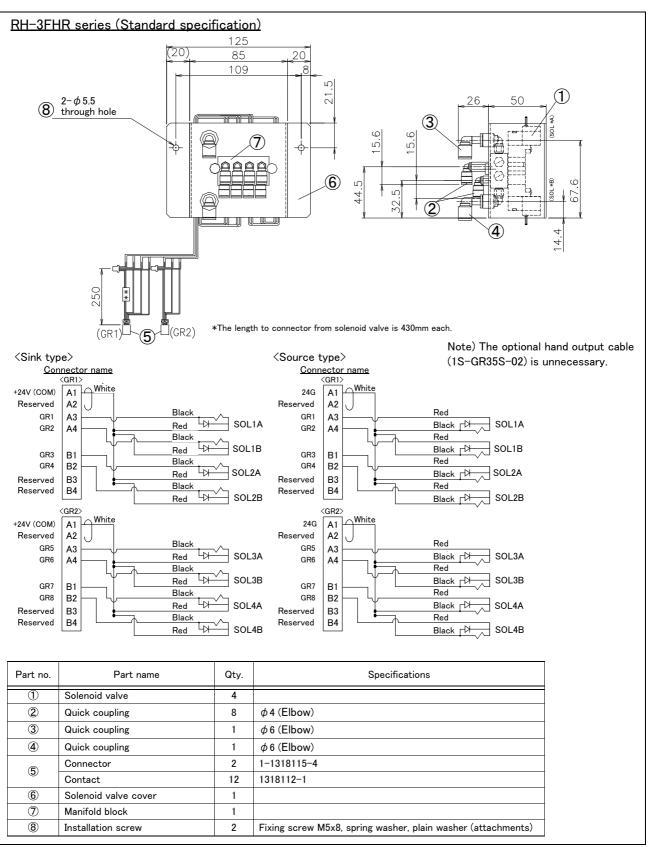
Outline dimensional drawing (RH-3FHR series: Standard specification)
